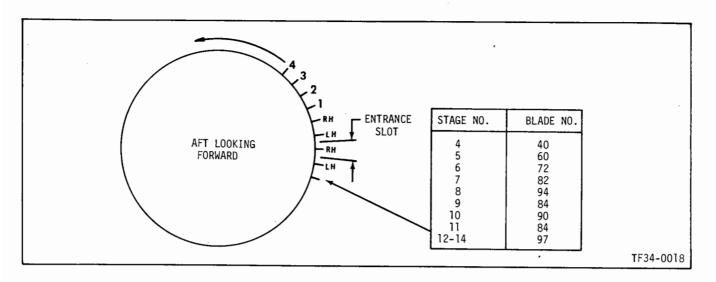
Installation of Compressor Blades, Stage 4 through 14
